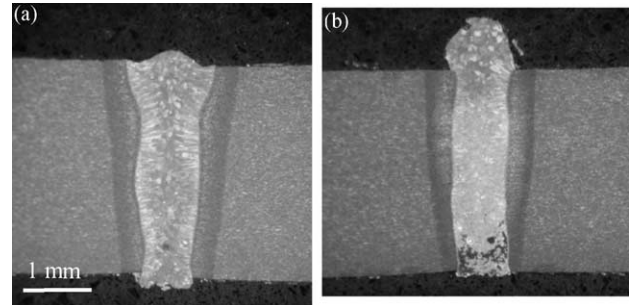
Macrographs of the sections of the butt welds of Table 2 using: (a) the coaxial nozzle and (b) the two-pipe nozzle.
